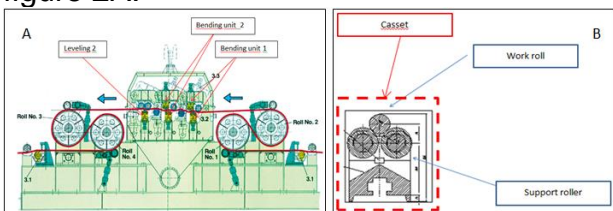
A) Simplified stretch bending unit layout with 3 units (2 bending and 1 leveling) in operation. B) Drawing of mounted casset of tension leveler.
